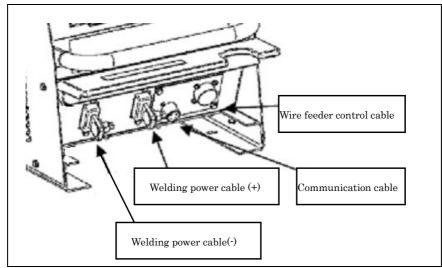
(m) Connection of ROBOWELD iC/E (Invertec CV350-R) (1/2)
